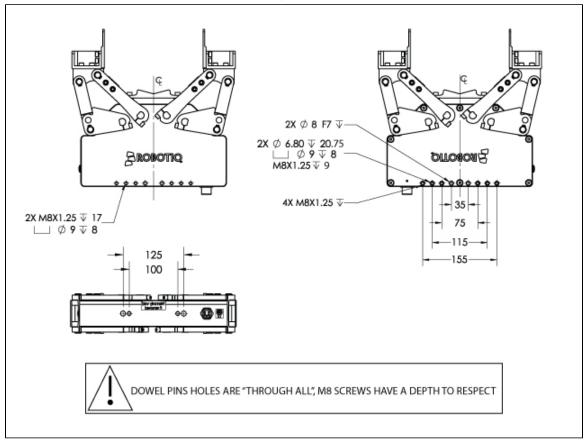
2-Finger Adaptive Robot Gripper – 200 dimensions for custom coupling.
